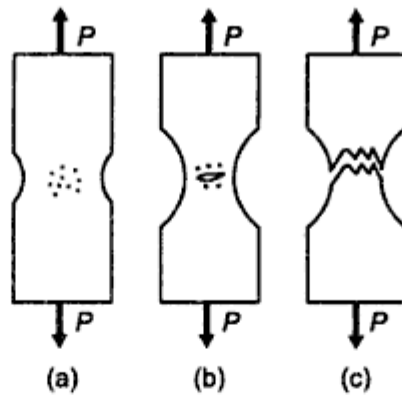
Stages of Ductile Fracture under Static Load (a) Formation of Neck and Cavities, (b) Formation of Crack, and (c) Cup and Con Fracture
